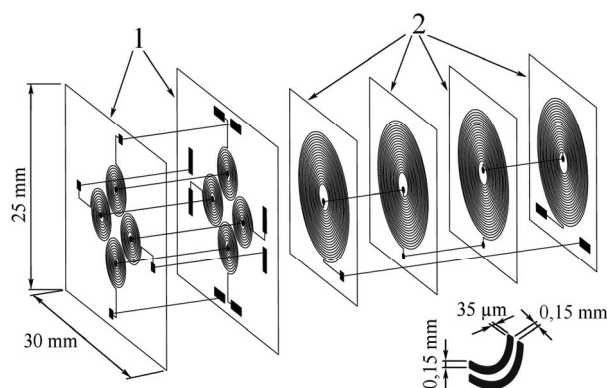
Schematic view of the PCB transducer (1 - two layers with the detections coils, 2 - four layers with the excitation coil)
